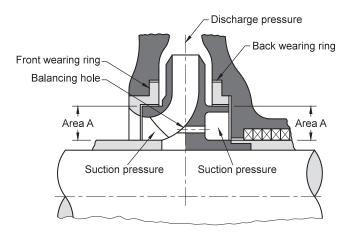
Balancing axial thrust of a single-suction impeller with wear ring on the back and balancing holes.
